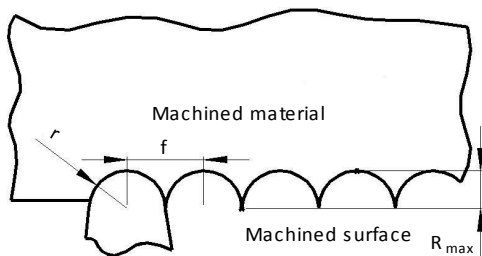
Sketch for machining a surface, taking into account the radius of cutter tip r
